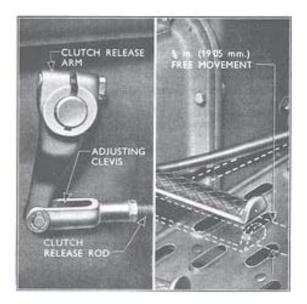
Clutch Pedal Free Movement Adjustment (Single Clutch)
